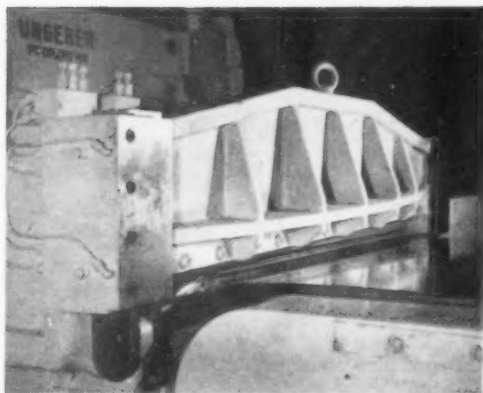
A close-up view of the Ungerer shear which cuts the coil without interruption of flow
